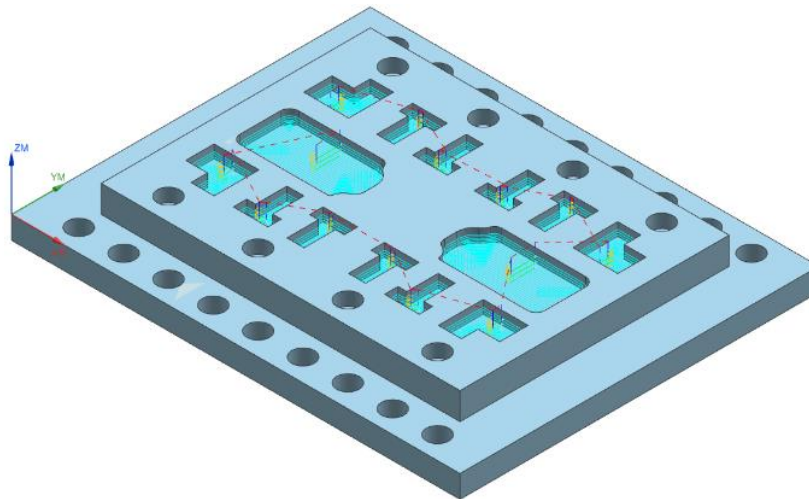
Shortest pocket cutting toolpath generated with multiple pockets
